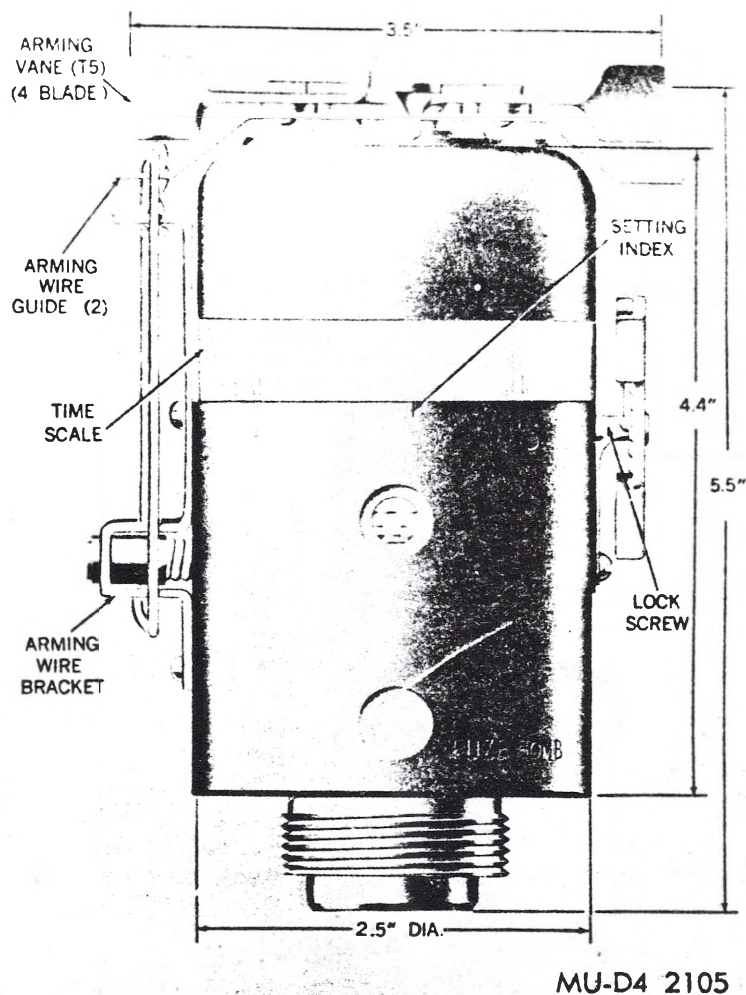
Dimensional Characteristics and External Appearance of Fuze M907
